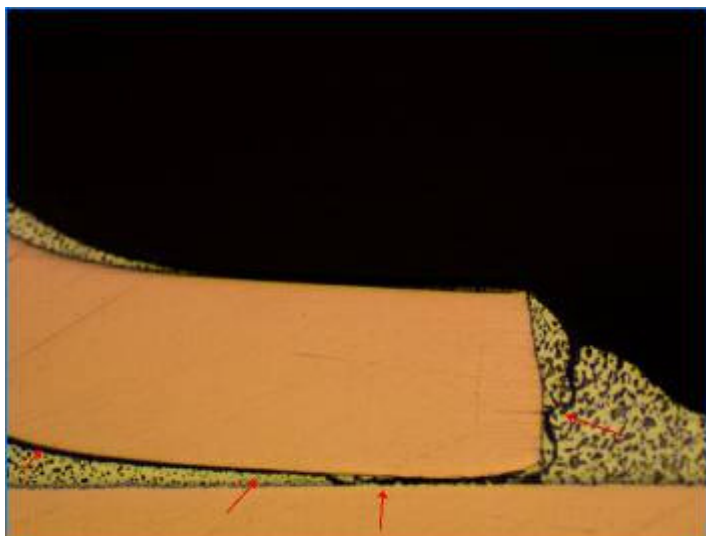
cross section, SN68, U31, right lead solder crack, 200xb
